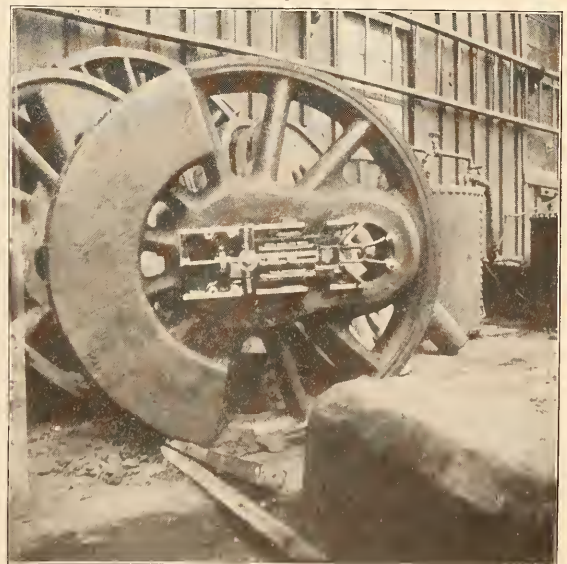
GAUGE FOR SETTING CRANK PINS, IN POSITION ON LOCOMOTIVE DRIVING WHEEL.
